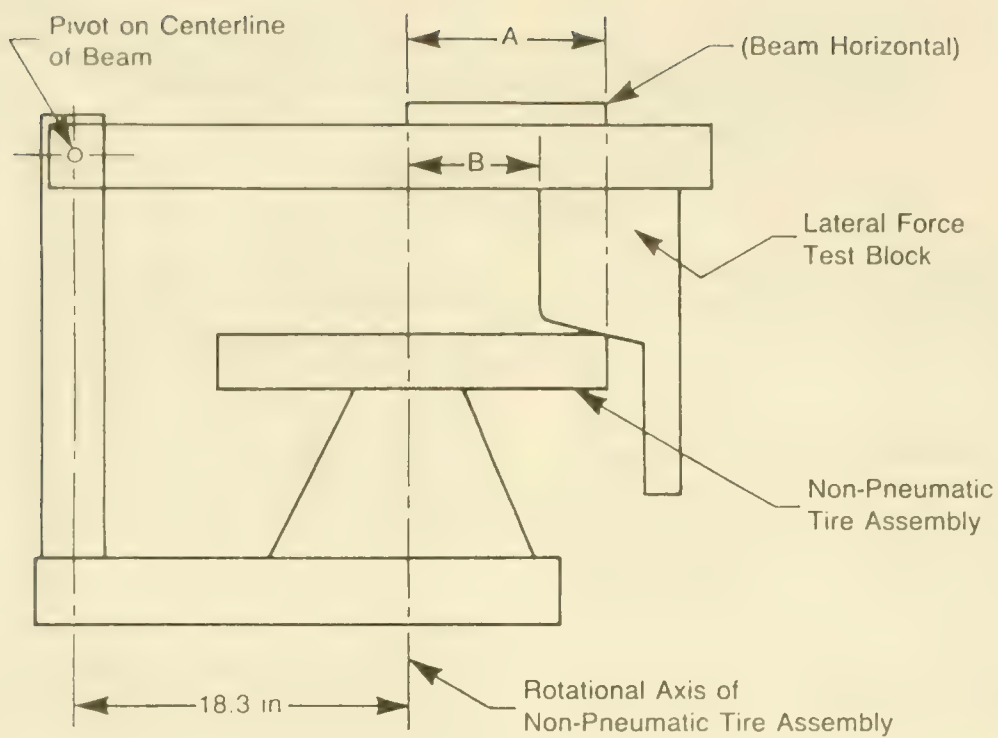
Lateral Force Test Fixture (Dimension in Inches)
